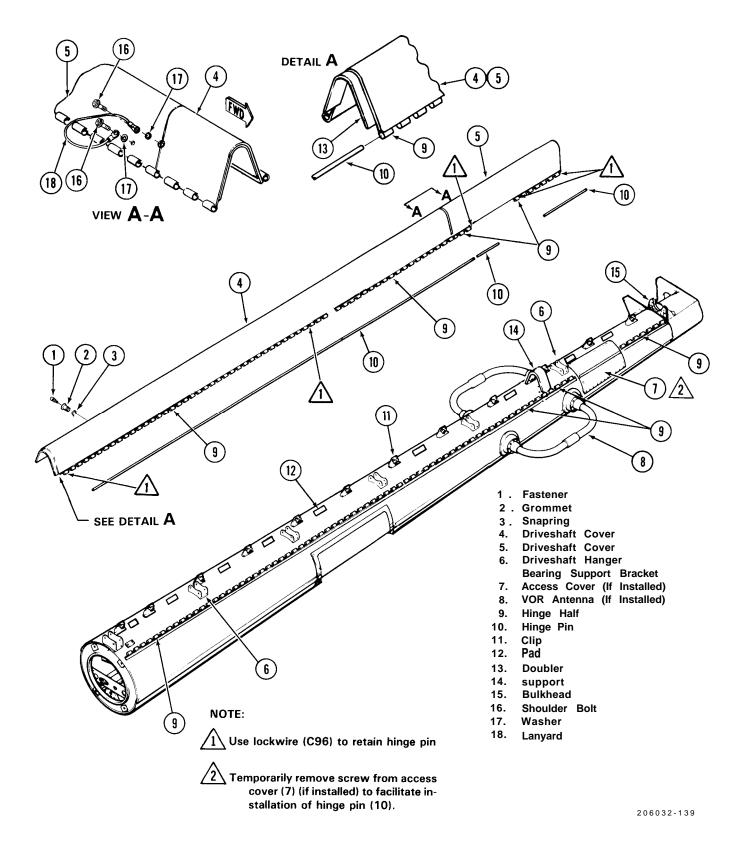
Tailboom Assembly (MWO 55-1520-228-50-25 Accomplished)
